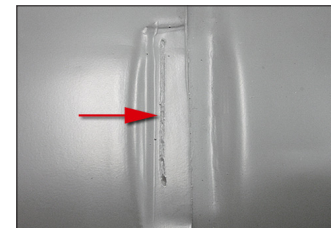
Laser welding is used on areas of the roof, quarter panel, and package tray.
